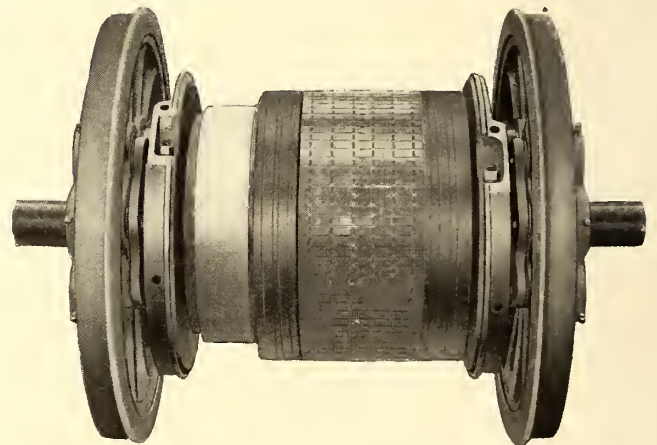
A PAIR OF DRIVING WHEELS, WITH ARMATURE AND BEARING HOUSINGS FOR SUPPORTING FIELD FRAME
